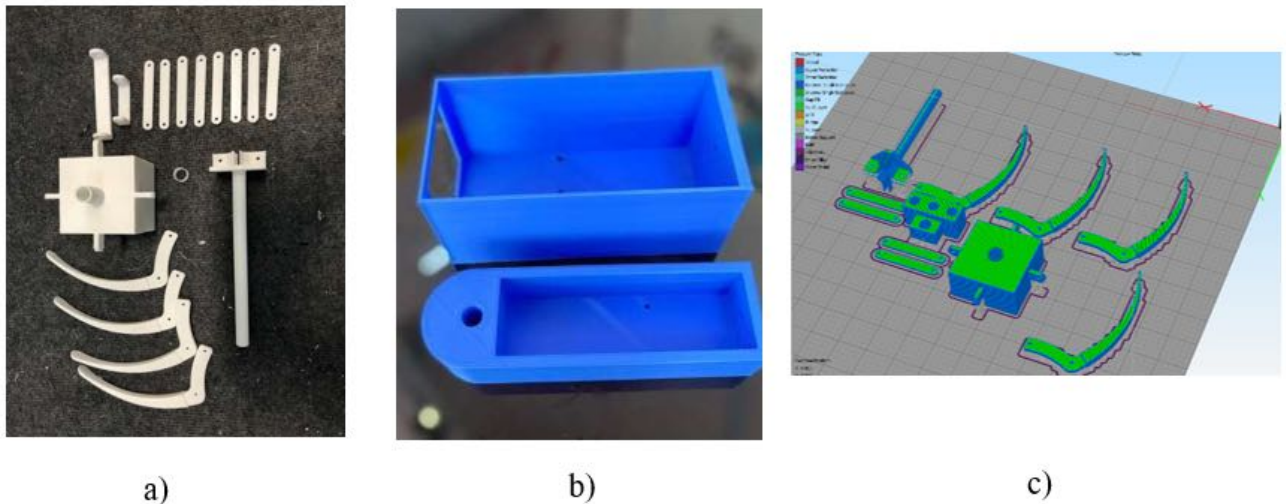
3D print parts: a) finger parts, b) holder parts, c) 3D print processing simulations
